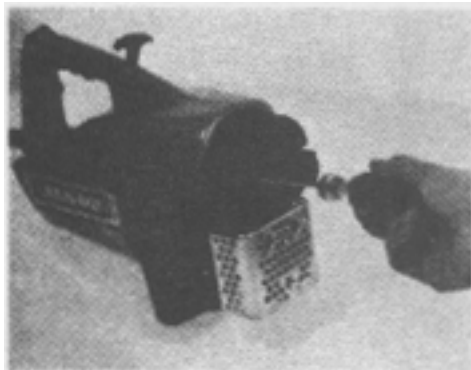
Unscrew mounting screws and remove choke cover assembly.
